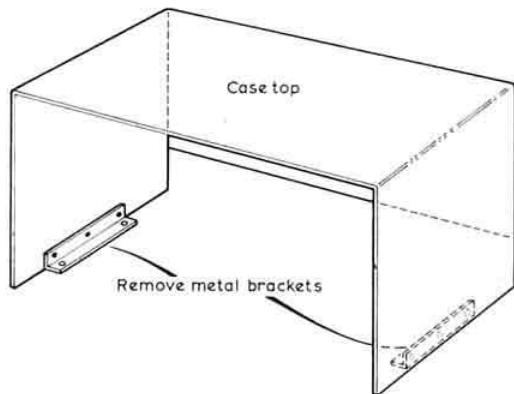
In the standard design, the case top is fixed to the chassis with two welded metal brackets. These are removed in the author's modifications
